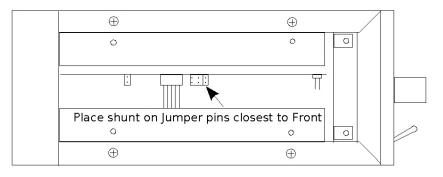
Shunt Position to Enable Level 4 Access
